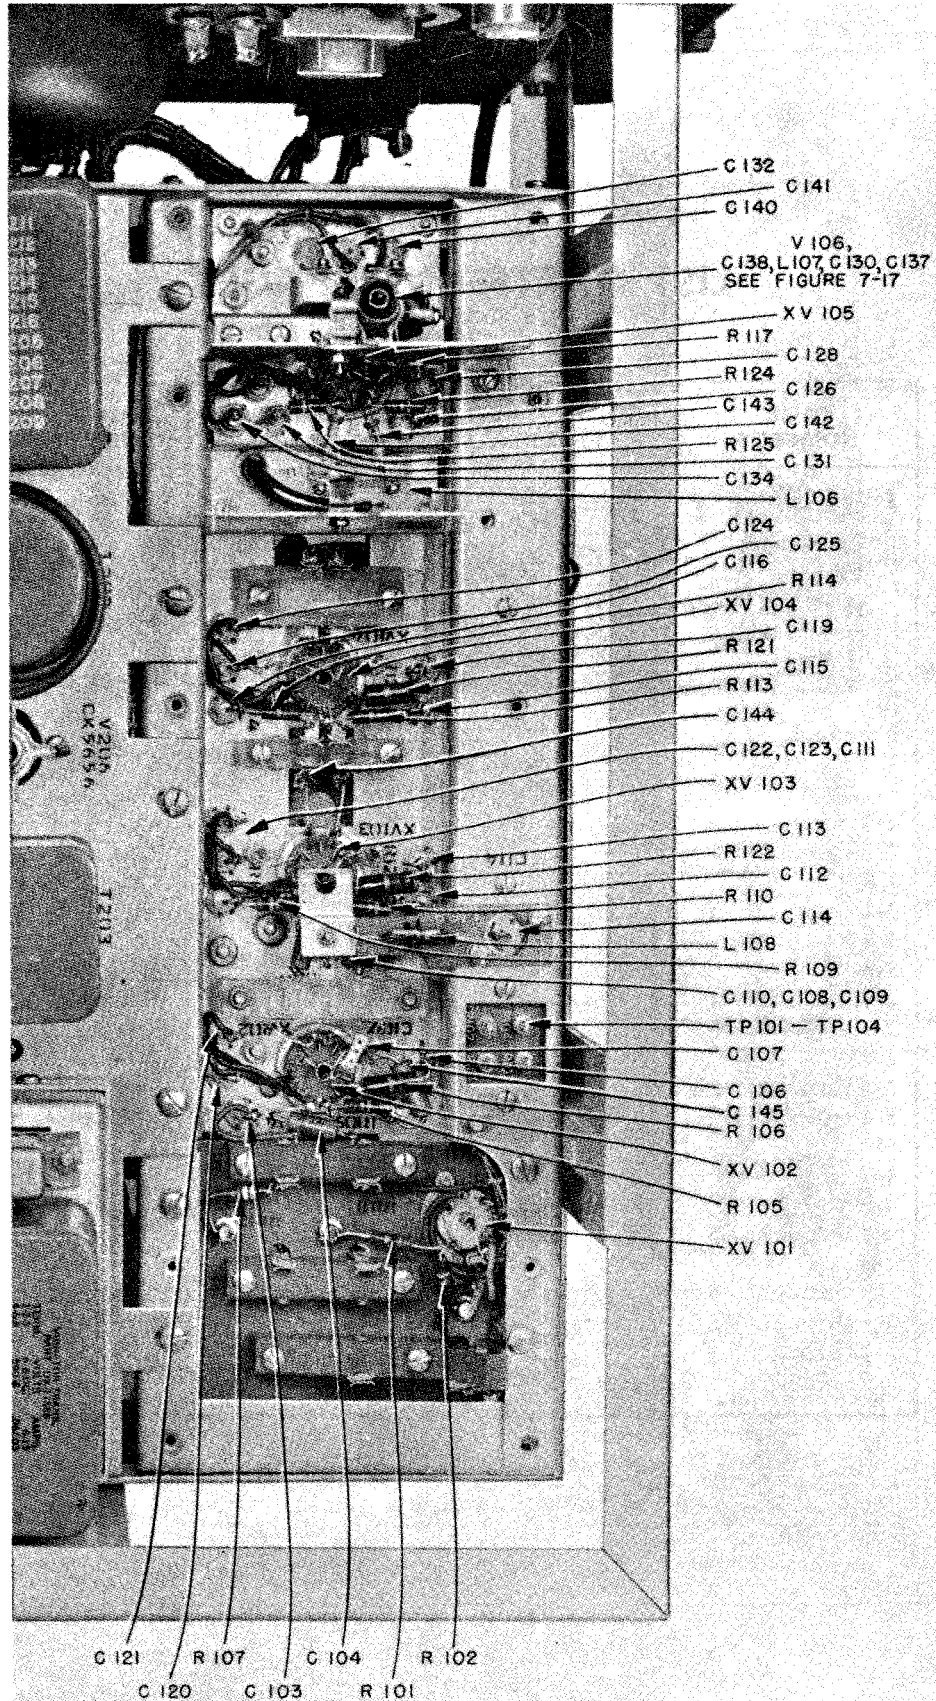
Underside of RF Chassis, Showing Component Locations.
